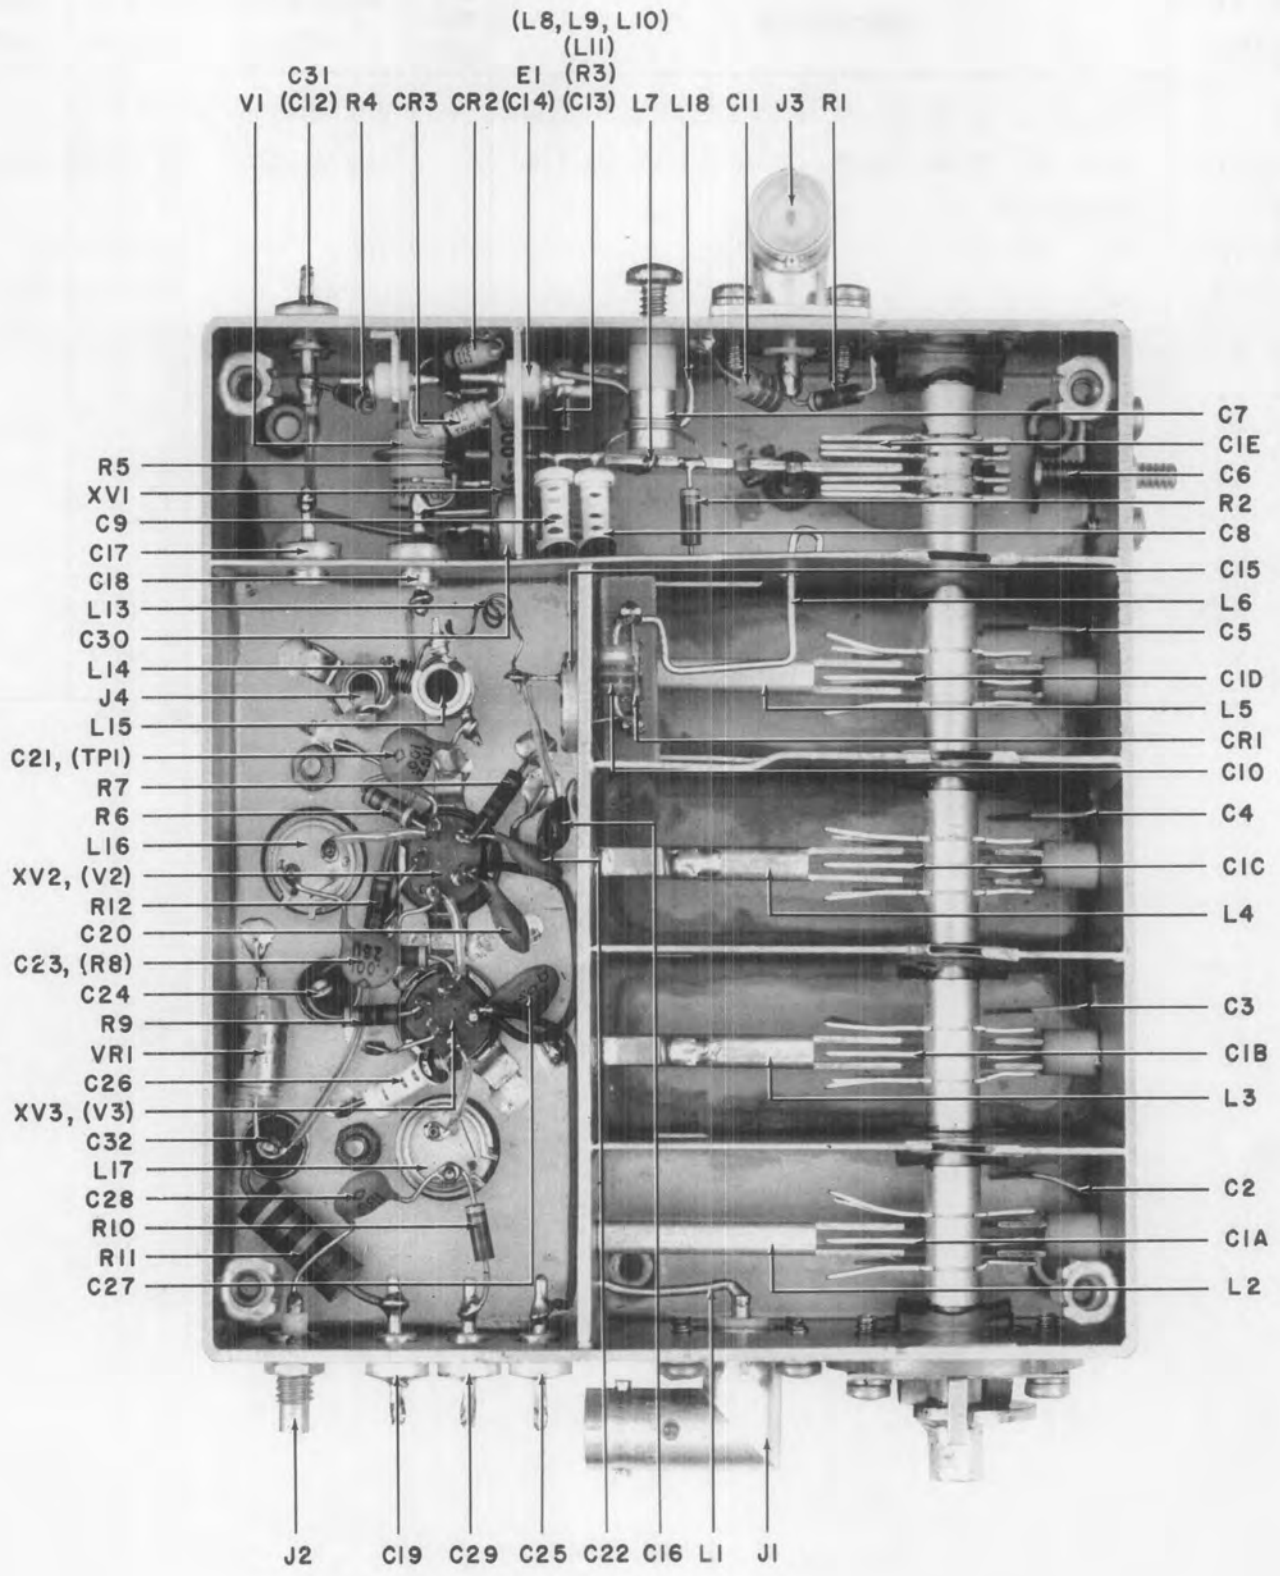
Type 71381 490-1000 MC Tuner (A4), Location of Components
